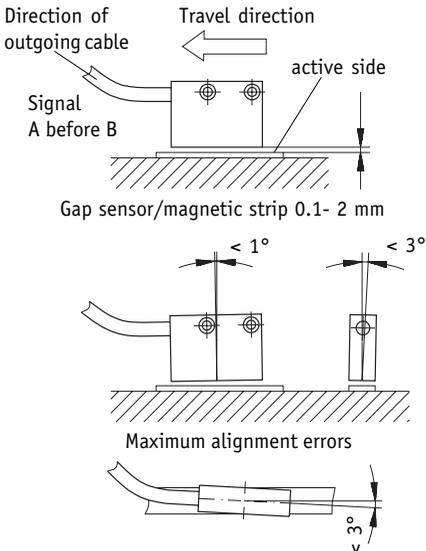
Definition of the counting direction with magnetic strip MB... and assemblage of sensor / magnetic strip, gap measures, tolerances
